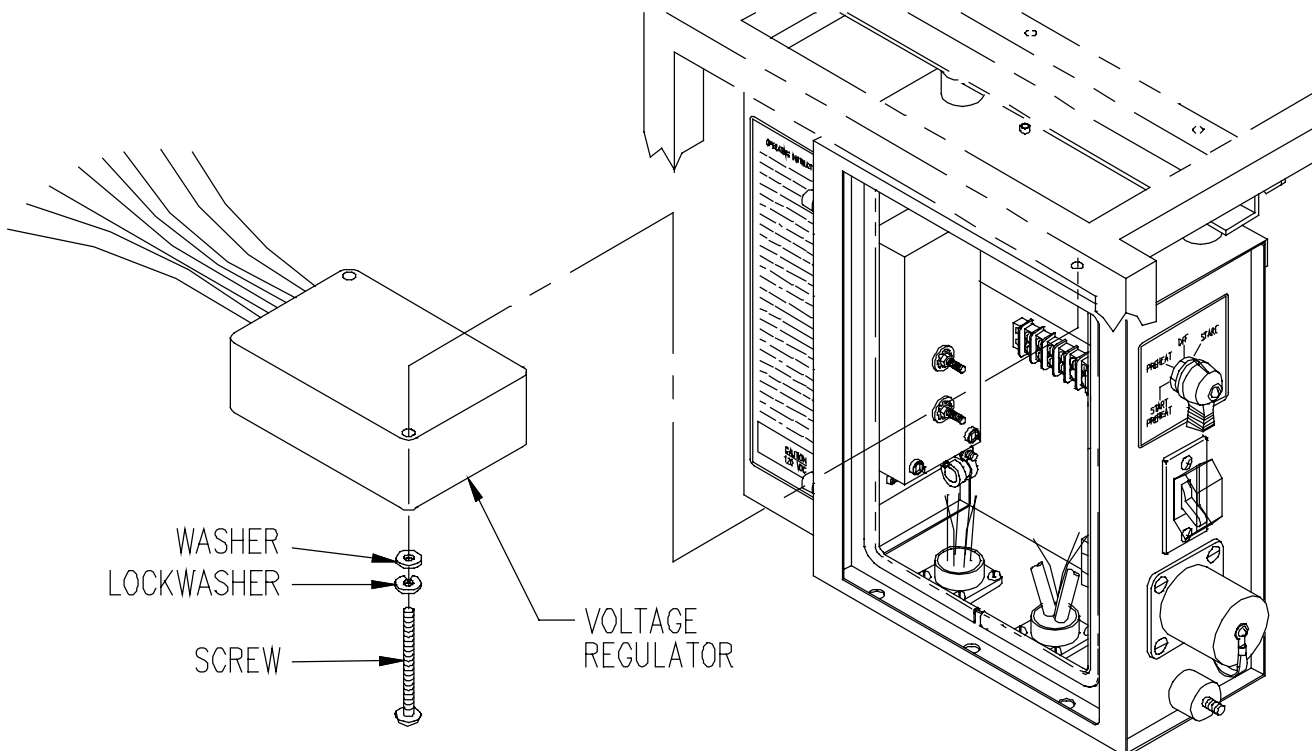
Voltage Regulator Assembly (MEP-531A)
